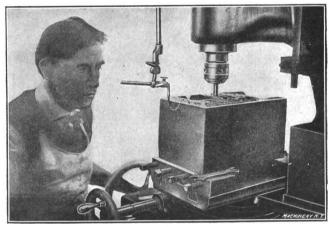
Milling out a Deep Impression with the Aid of an Indicator
